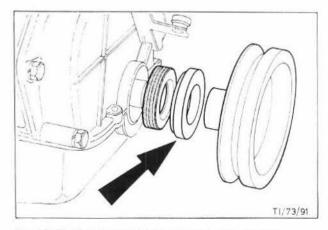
Fit oil seal. Special Tool No. 21-046 arrowed.
